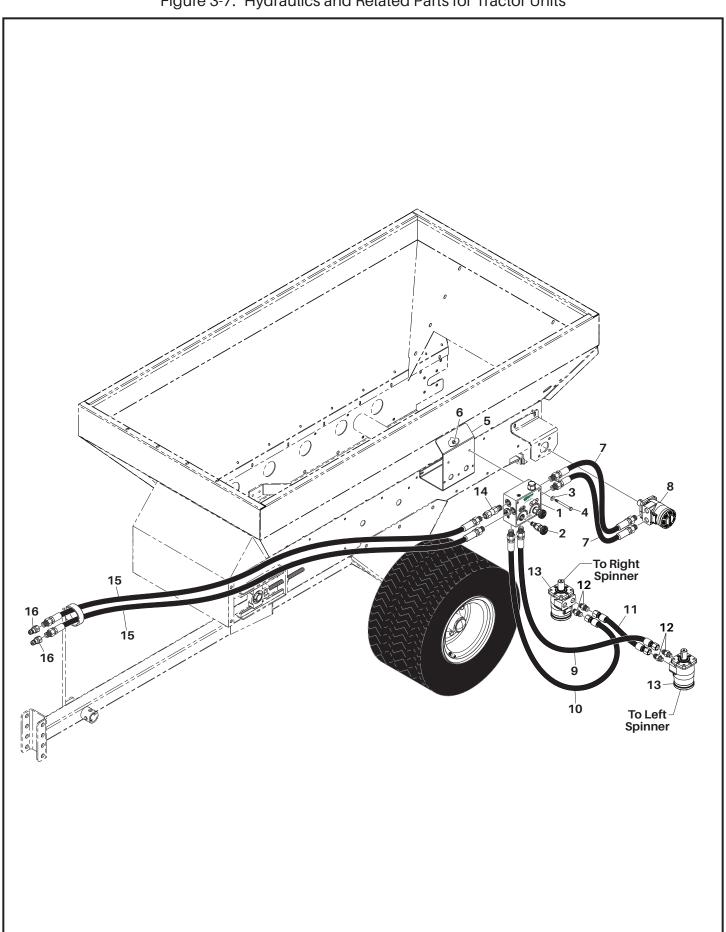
Hydraulics and Related Parts for Tractor Units
